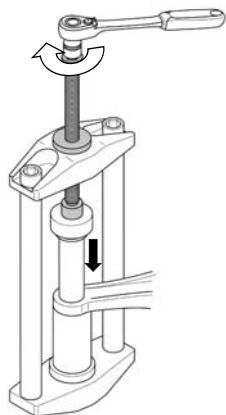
Removing a Silentbloc / Pivoting Bearing.
